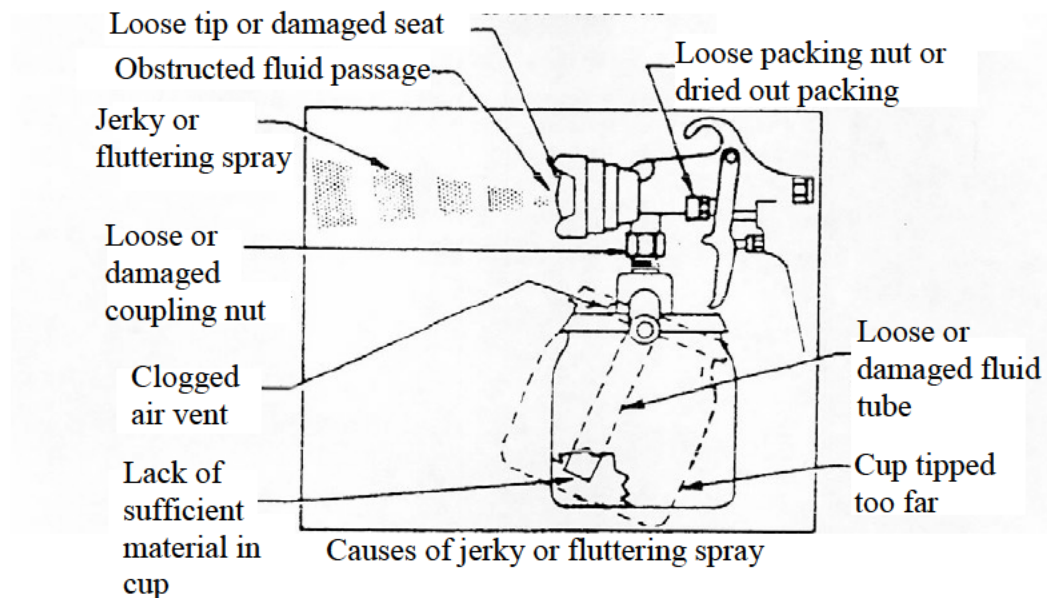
Spray painting technique (Sheet 2 of 2).
